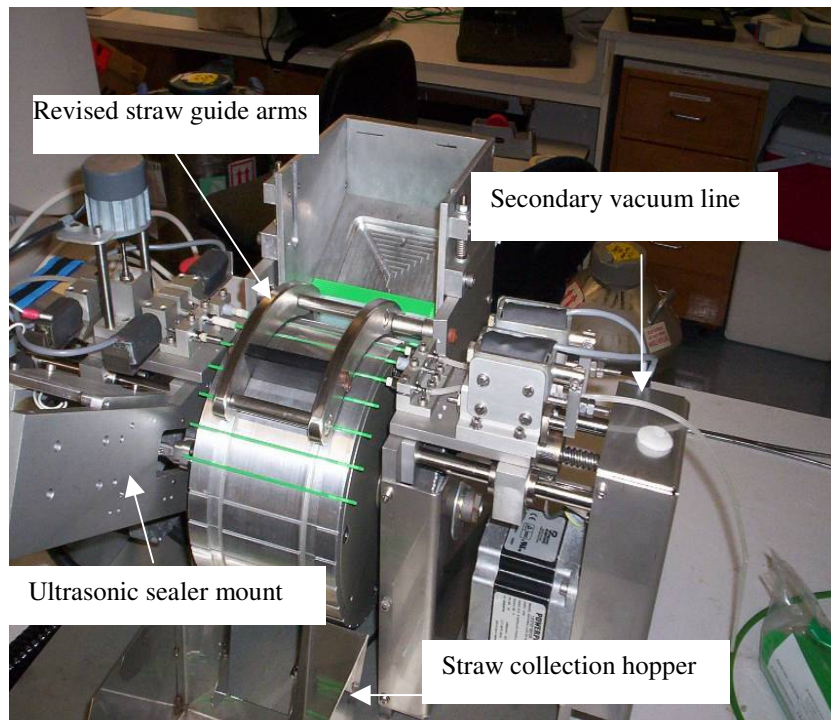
Revised machine showing off-board vacuum line bypassing solenoid actuated vacuum pump. Also shows revised straw guide arms
